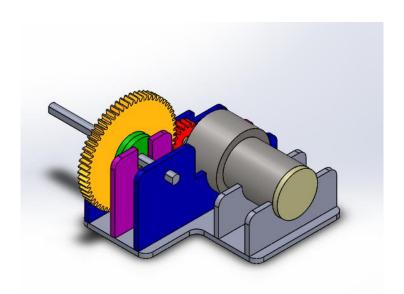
The Mark 2 gearbox configuration with drive shaft spacers shown in green (Isometric view).
